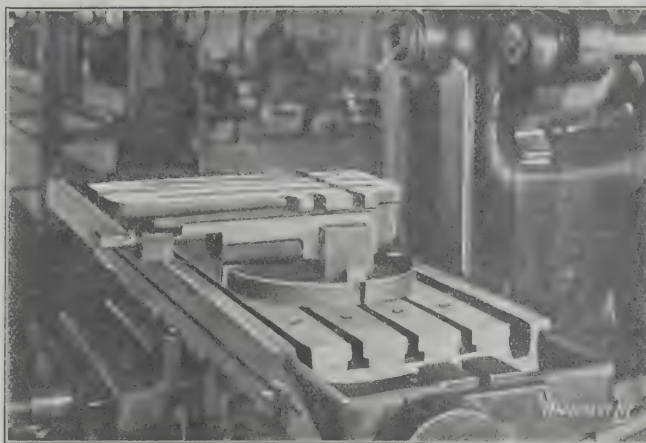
Fixture for Holding Milling Machine Vises while slotting them
